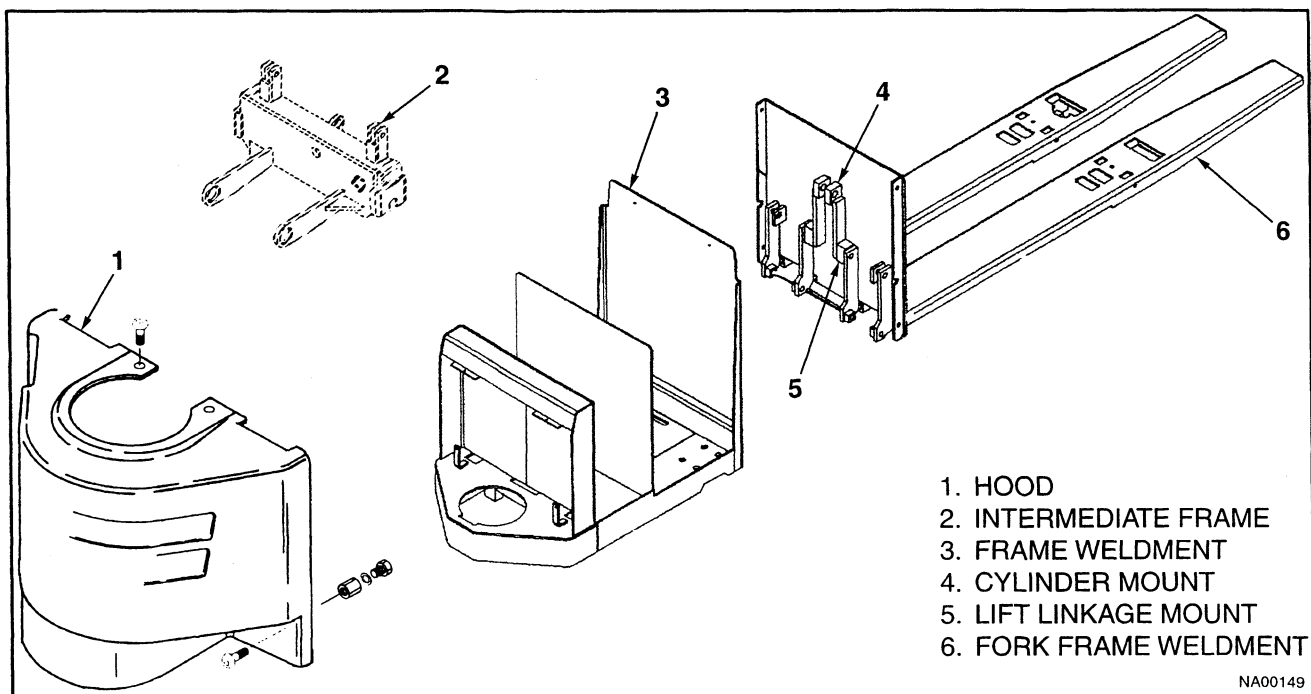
FRAME WELDMENT – CA60-80XT
